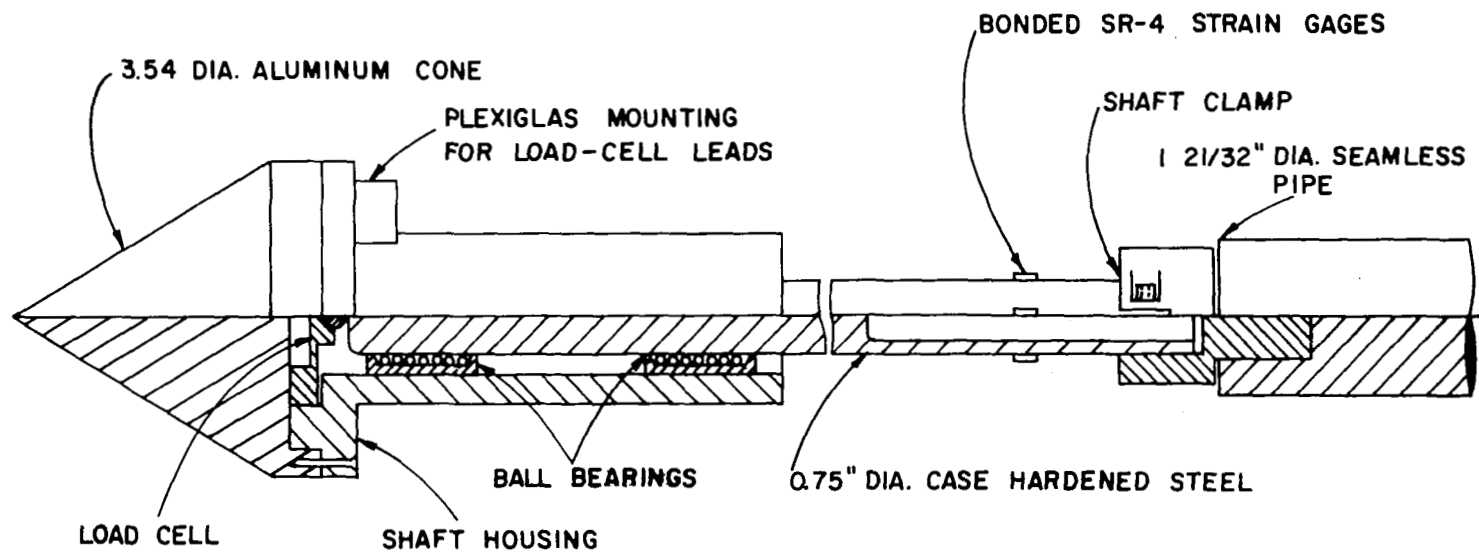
DETAIL VIEW OF MODEL PENETRATION ASSEMBLY — PHASE III
